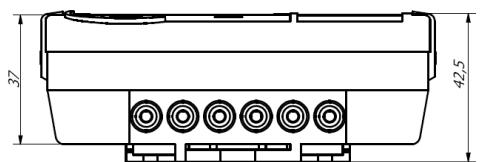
Sizes and dimensions of heat meter IFX-M4-03
